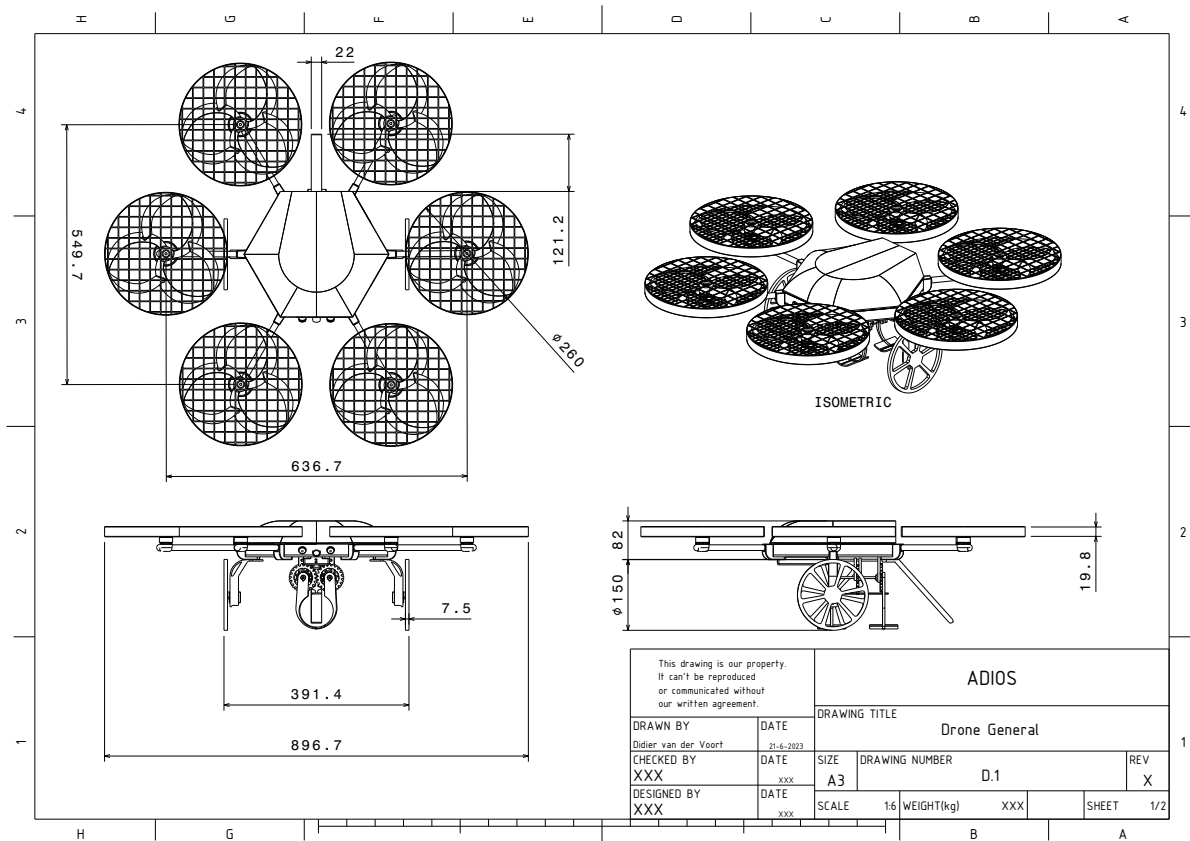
Technical drawing of the drone with the grabbing mechanism made in 3DEXperience with dimensions in millimetres
